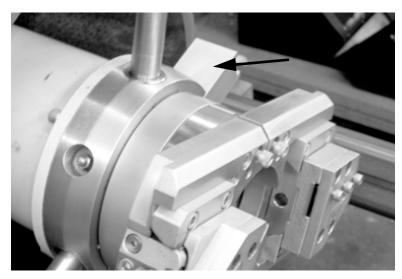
The trip assembly fastens to the front flange of the cutting machine with two screws.
